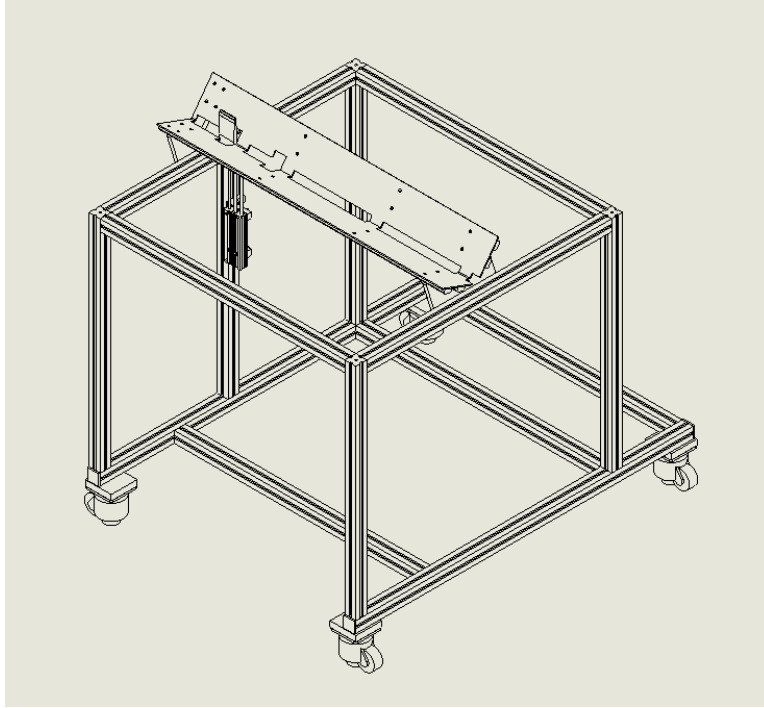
Isometric view of the completed semi-flexible tube pick system, showing final assembly of the tray, actuator, vacuum components, and supporting frame.
